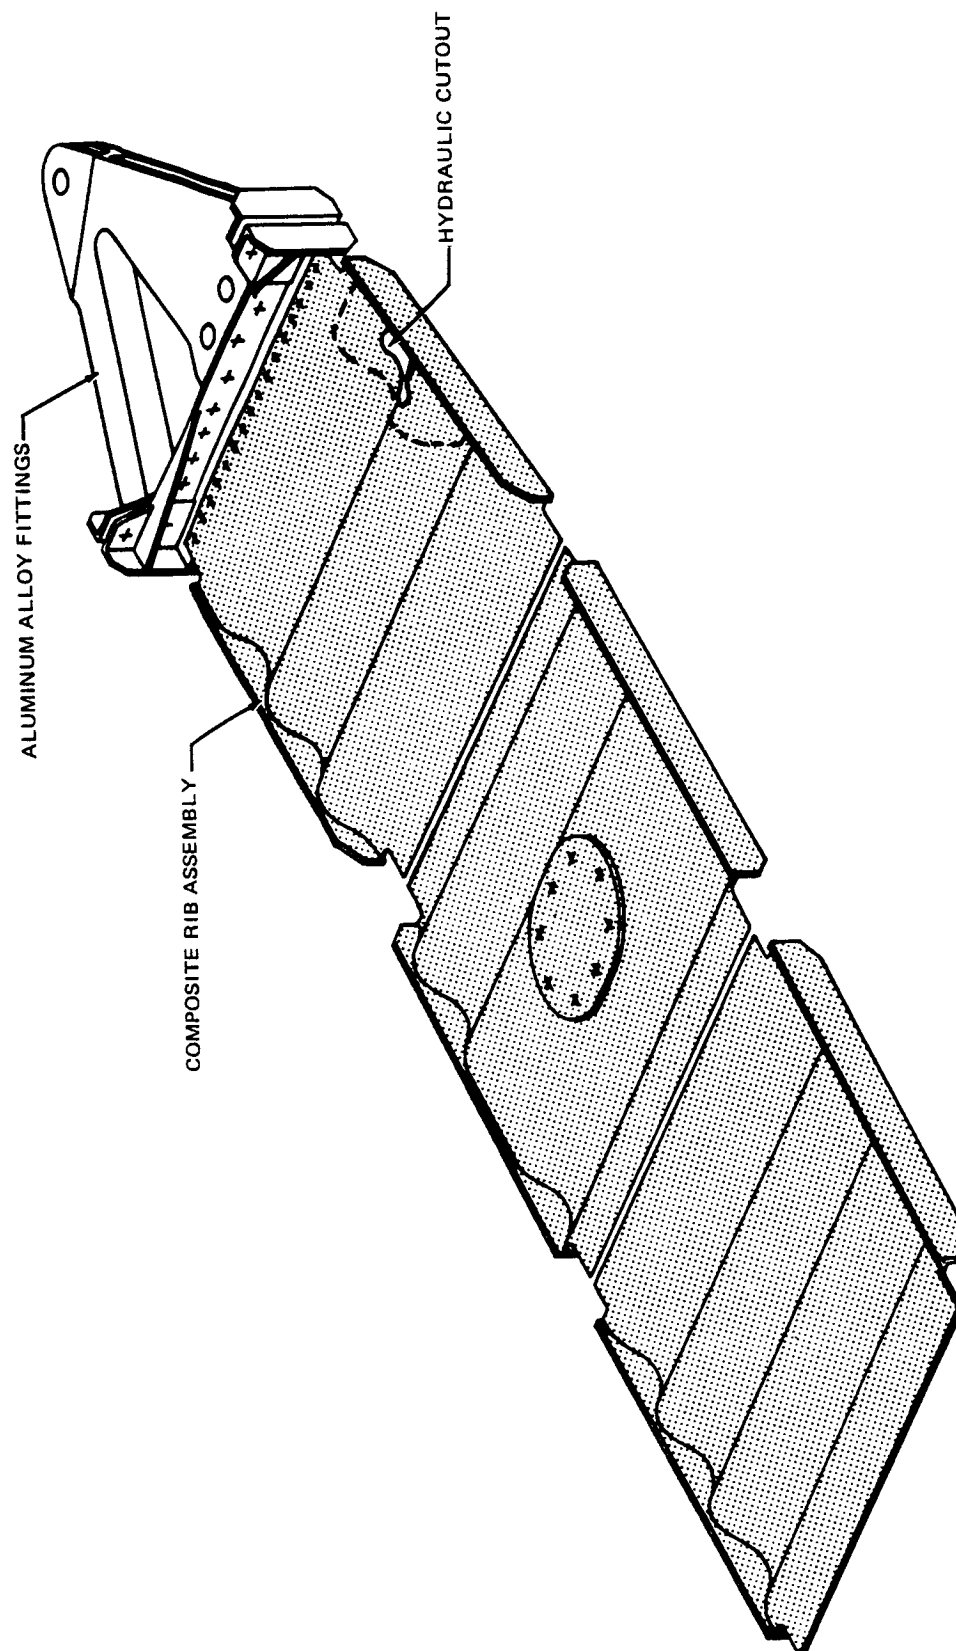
ACTUATOR RIB 314 ASSEMBLY
